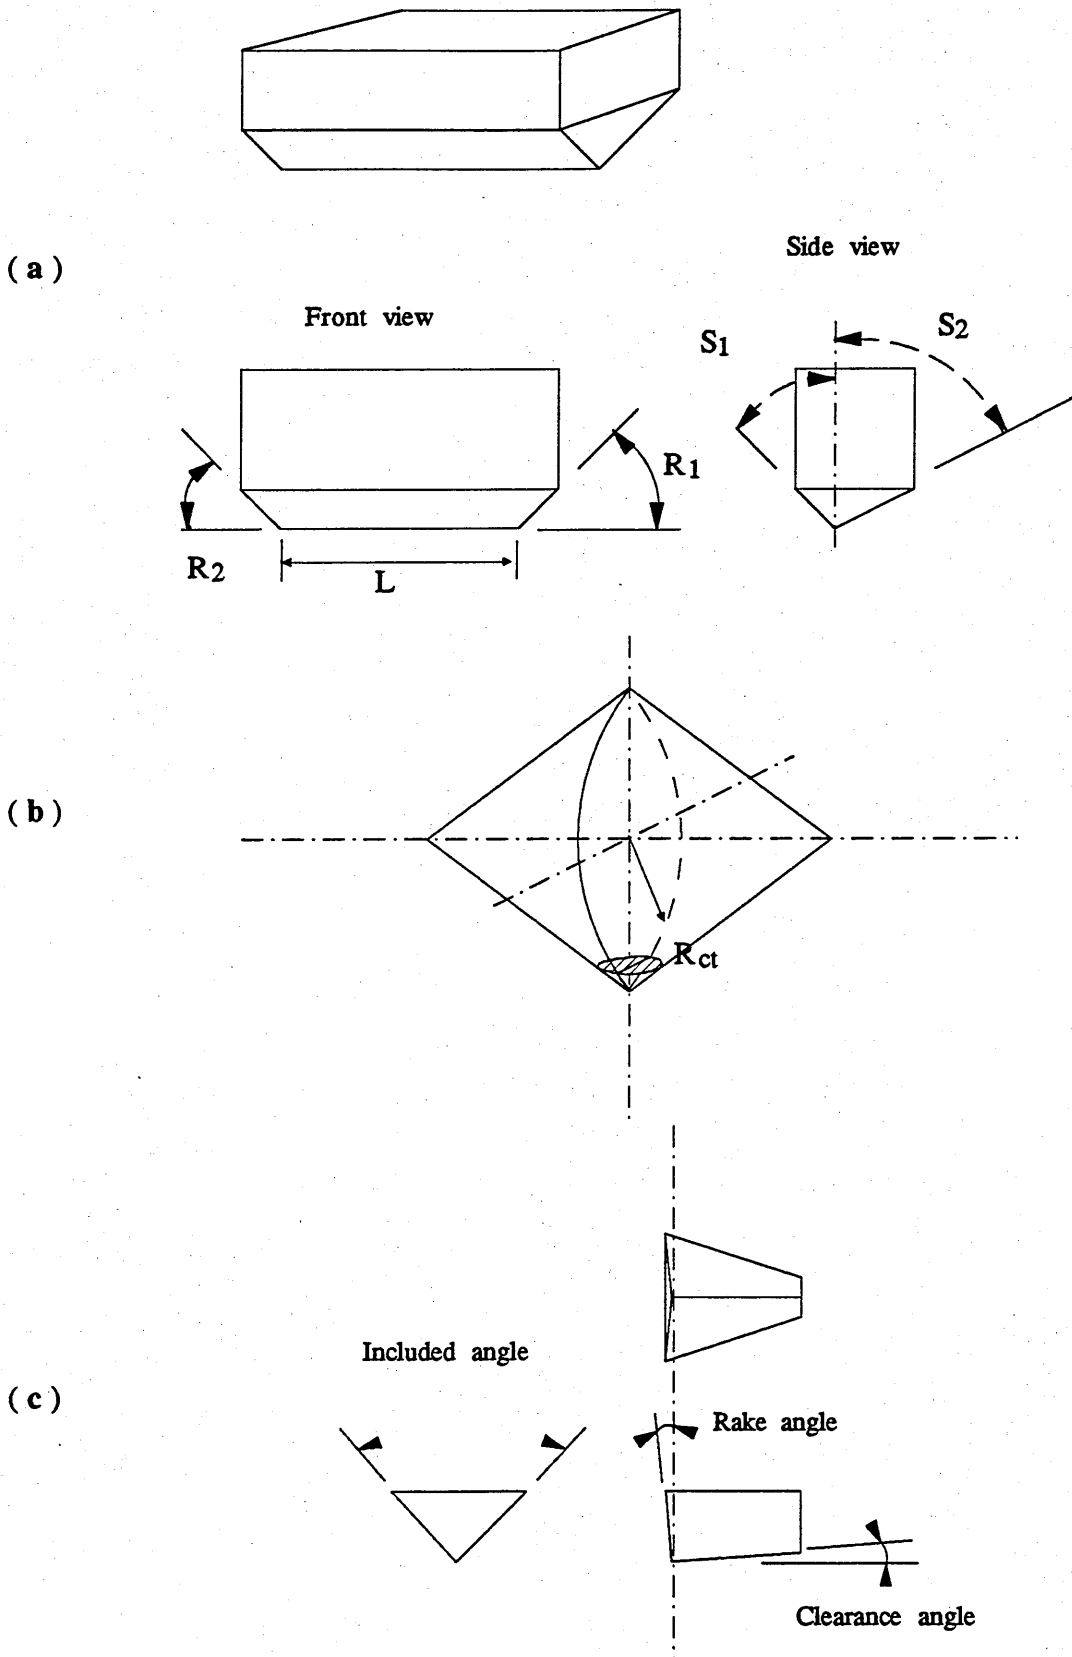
(a) double-ended (roof-edge) type tool (b) double-cone ( 'canoe'- or 'hatchet'-shaped ) type tool (c) scratch diamond tool .
